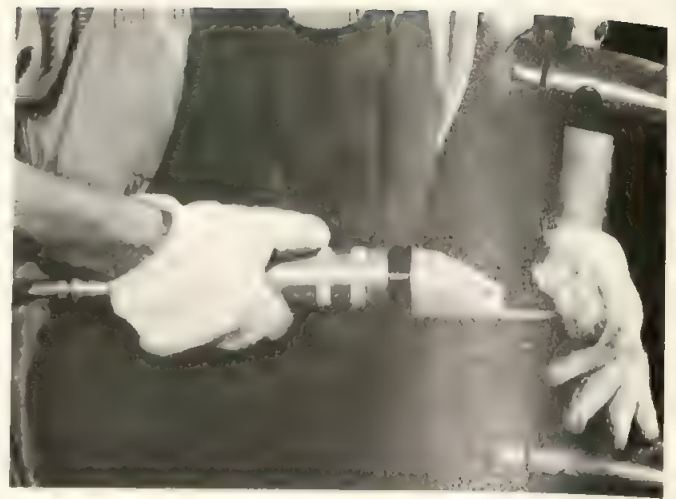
Dressing spot welding electrodes.
